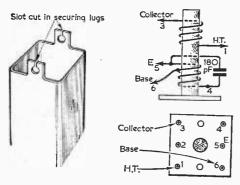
The mounting lugs of the transformers are cut as shown to enable them to be passed over the fixing bolts (see text).
